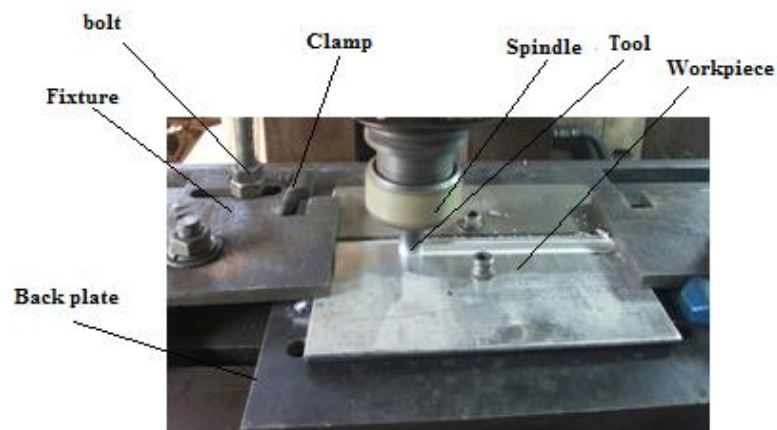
Shows the Welding tool , work piece clamp & fixture on the milling machine bed
